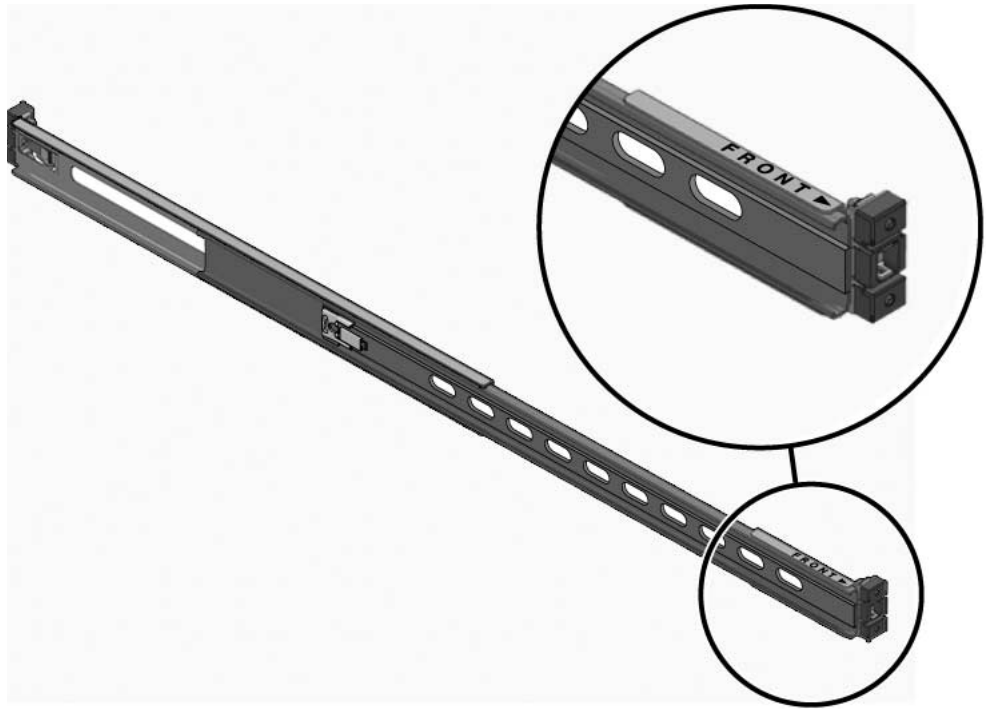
Attaching an Express Rail Mounting Bracket to the Chassis
